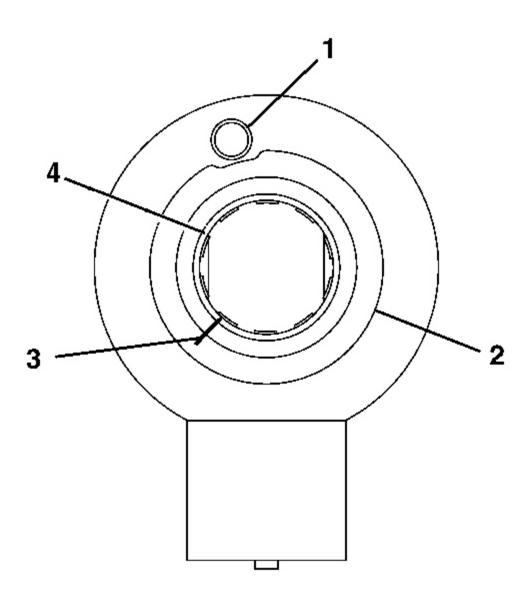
Steering Wheel Position Sensor Foam Ring, Pin Hole & Rotor Flange Cuff Courtesy of GENERAL MOTORS CORP.
